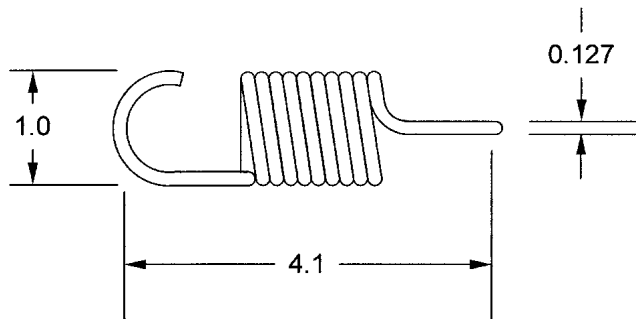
Drawing of the spring used in this investigation (dimensions are in millimeters). The spring is composed of 9.25 turns.
